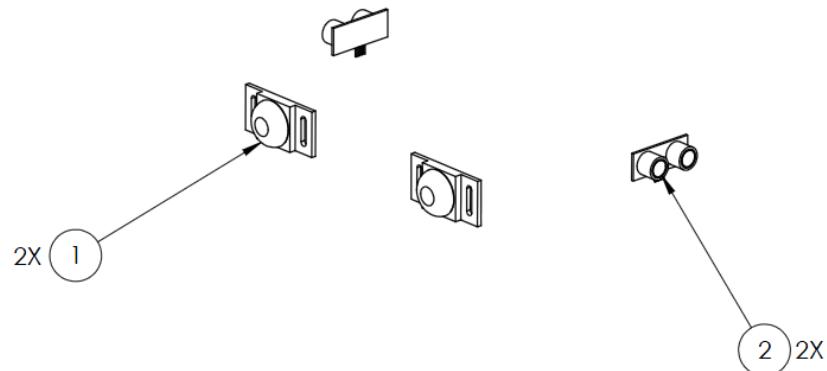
Vehicle Sensor Array Subassembly Exploded View
